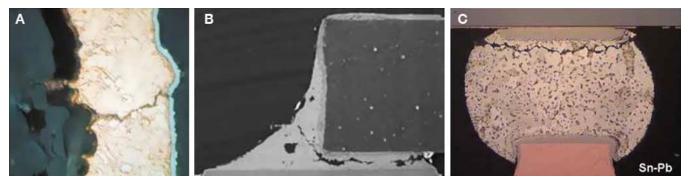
Examples of typical circuit board structural failures: (a) cracked copper barrel wall in a signal carrying plated through-hole via, (b) solder attachment crack at a surface mount resistor, and (c) solder ball crack in a BGA integrated circuit.
